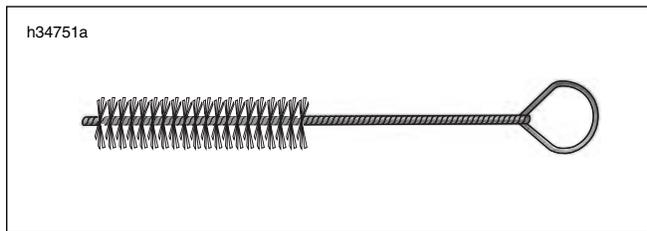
Valve Guide Brush (Part No. HD-34751)
